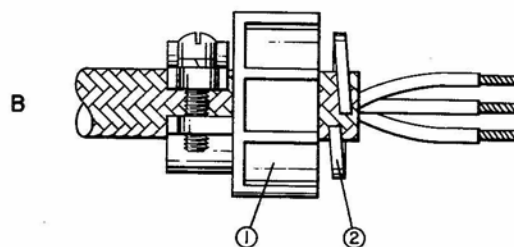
Fabrication of Power Cable to A.C. Power Plug P-102
